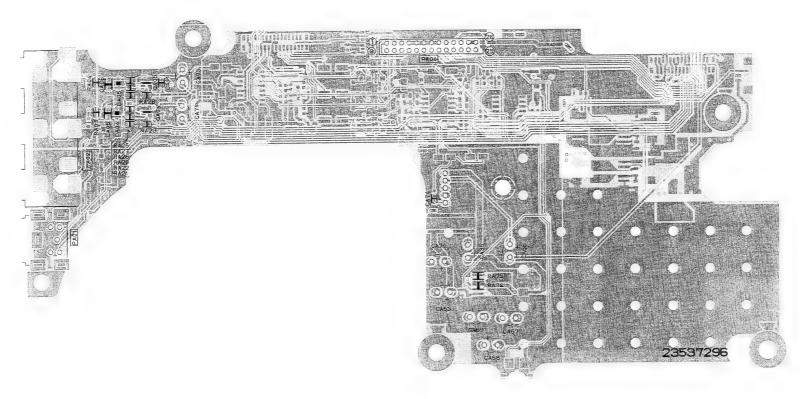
U0022 Input PC Board (Bottom Side)
